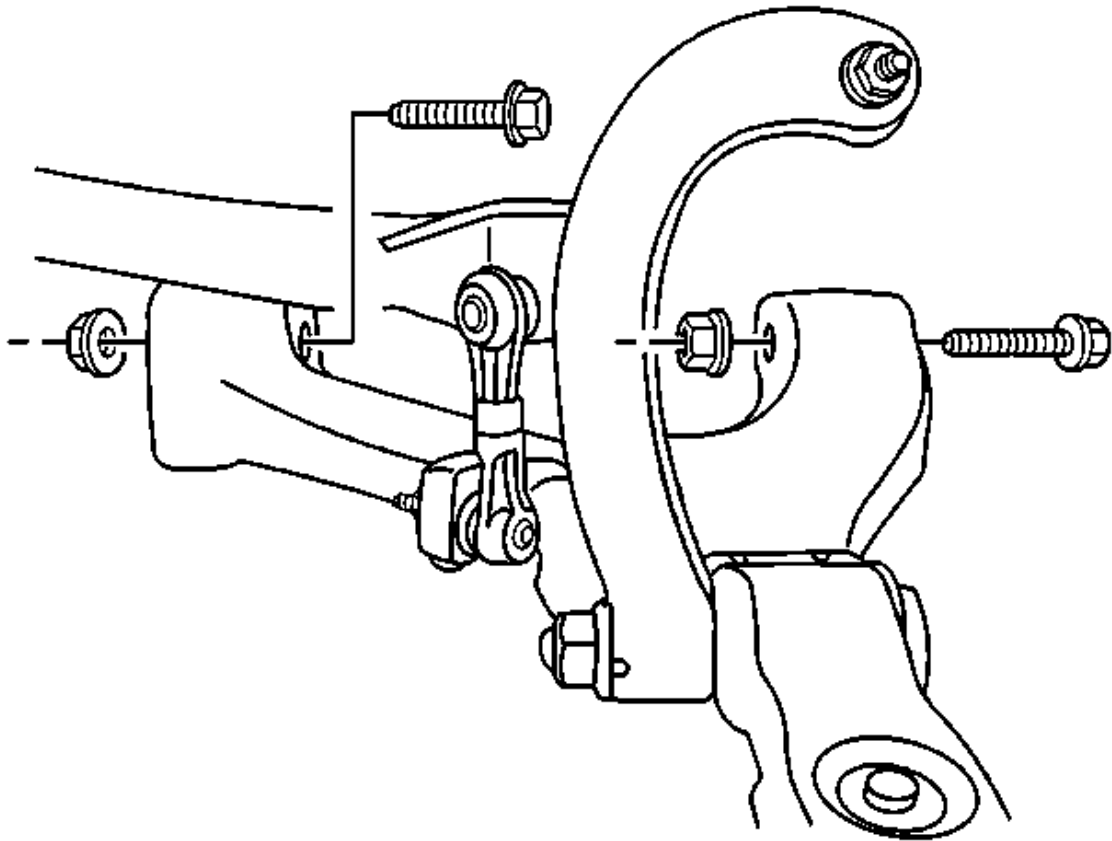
Removing/Installing Lower Control Arm-To-Lower Control Arm Bracket Mounting Nuts
